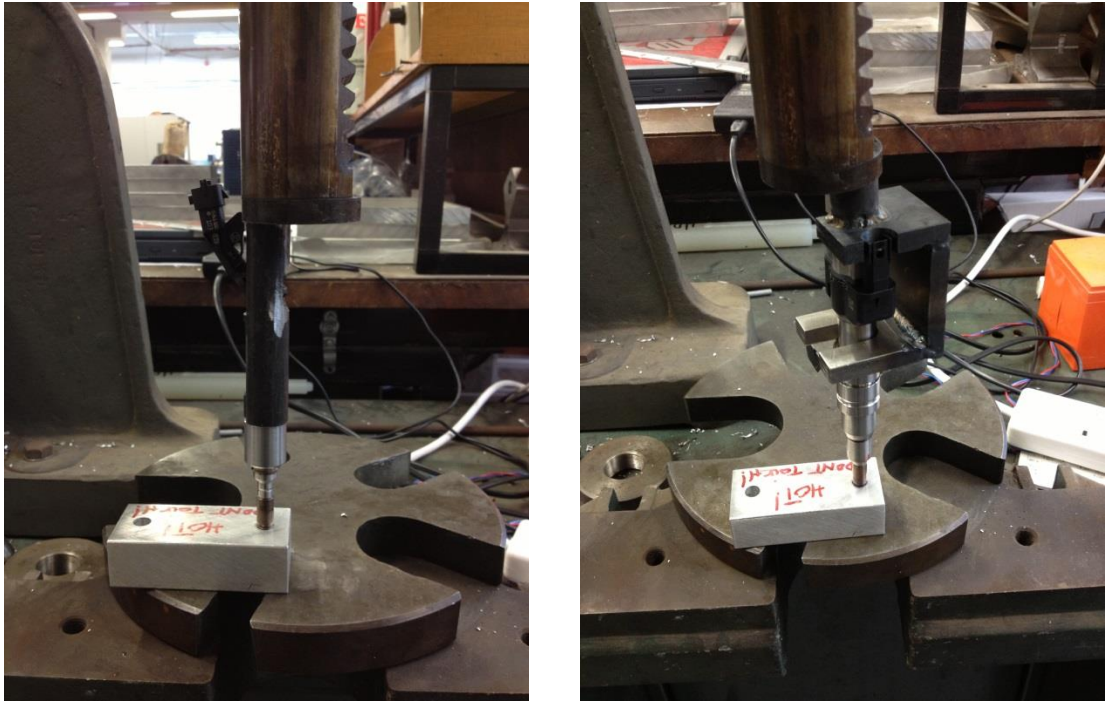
Sleeve press fitting - Multi-hole solenoid injector (left) and Piezo type (right)
